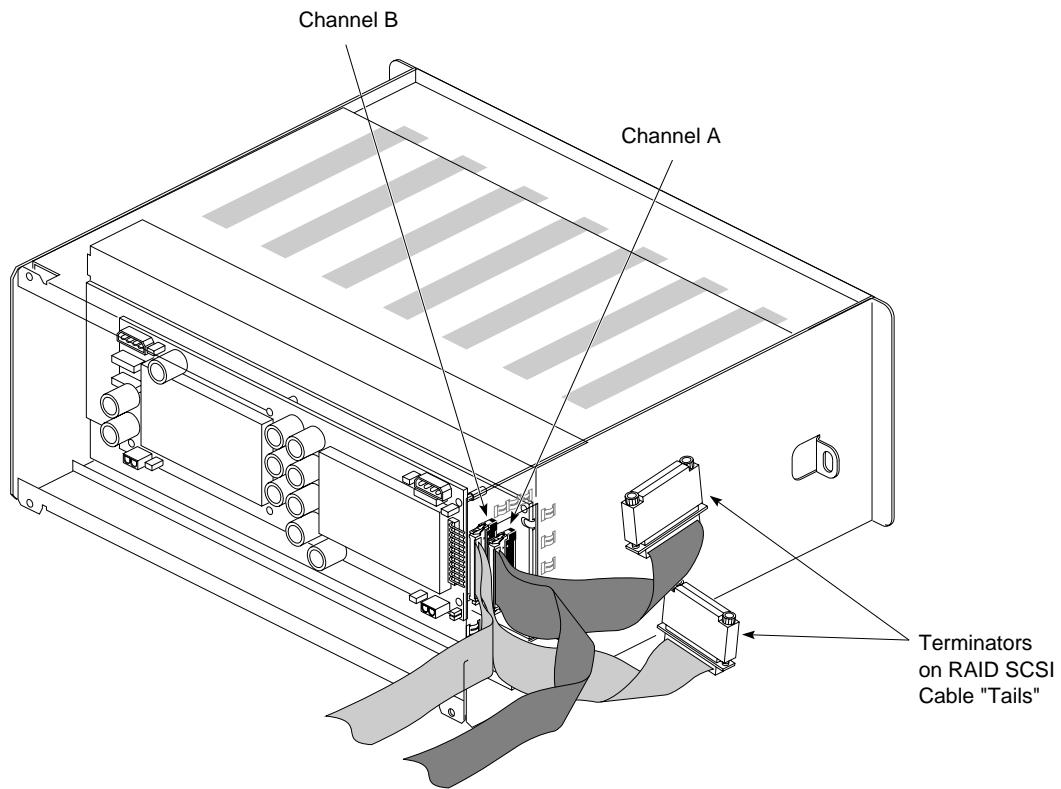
“Stubby” RAID Box Cabling and Termination
